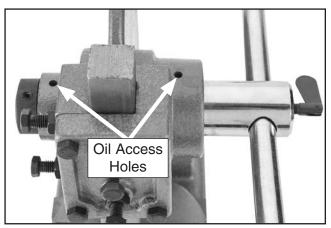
Locations of oil access holes to lubricate pinion hub shaft.
